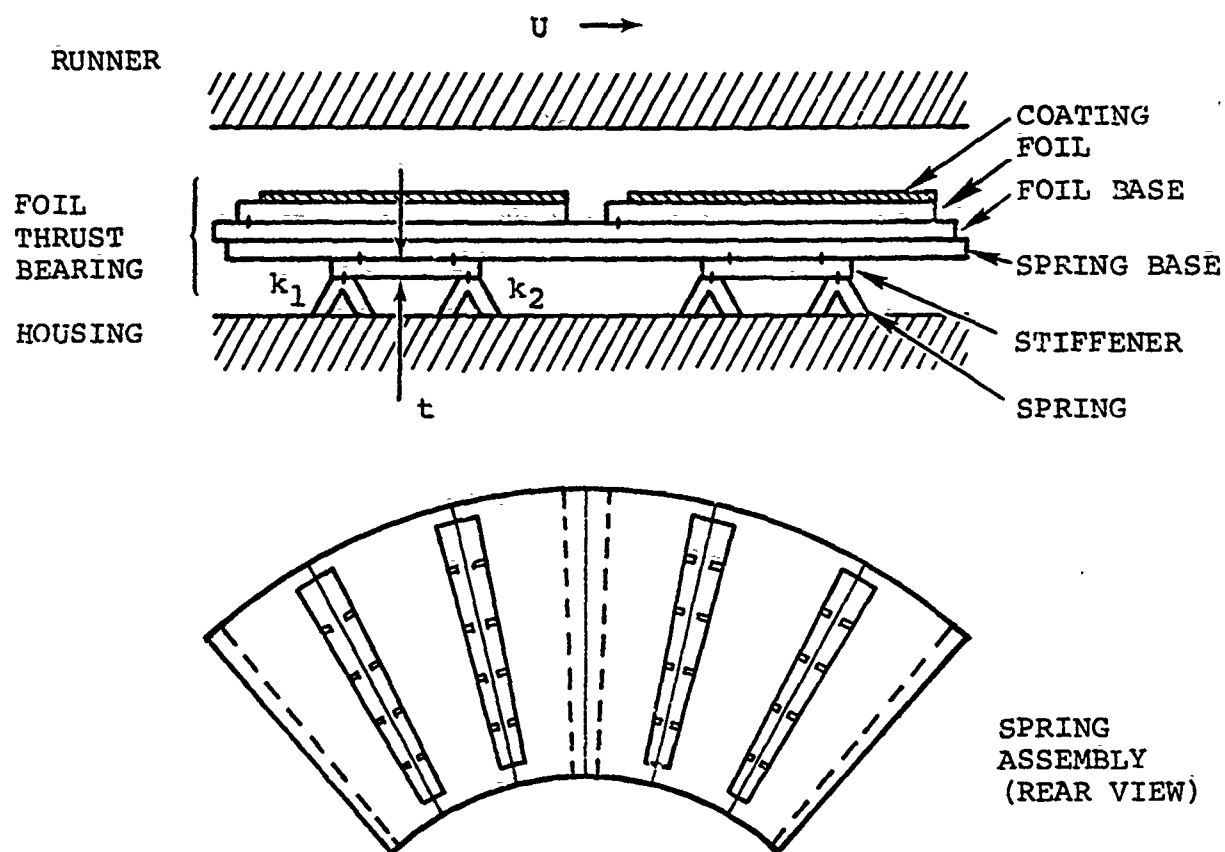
Dual Spring Foil Thrust Bearing Schematic.
